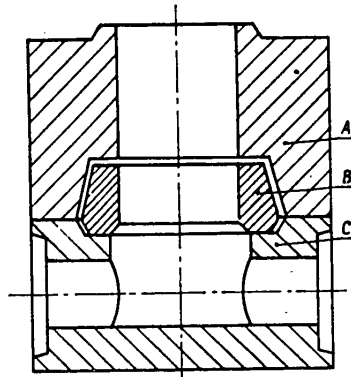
Combination of end tube of fountain, insert and distributing block in mold stool
